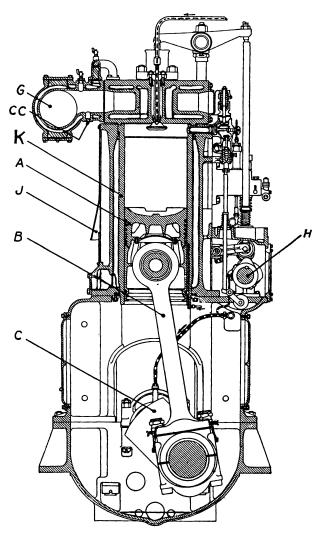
Nelseco Diesel Engine, Type A.M.I.
